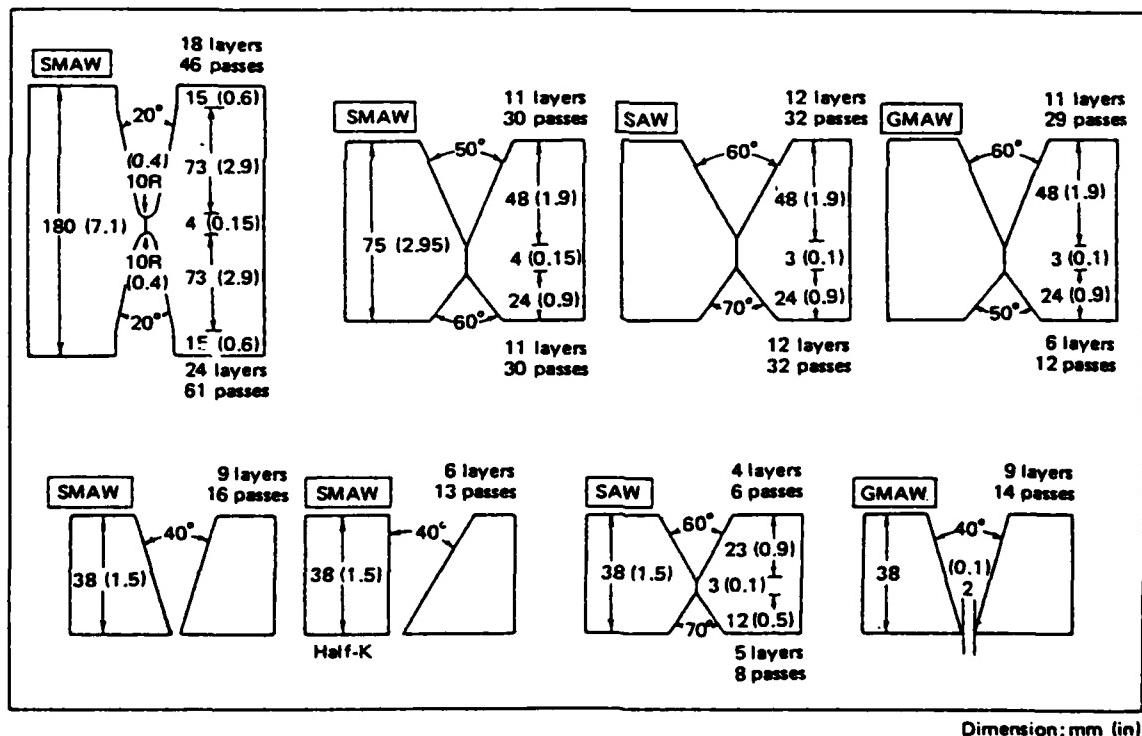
Welding conditions and edge preparations for welding HT80 steel--NK-HITEN 80 CLT--for service to -76°C. [NKK Tec. Doc. No. 243-035, (1984)].
